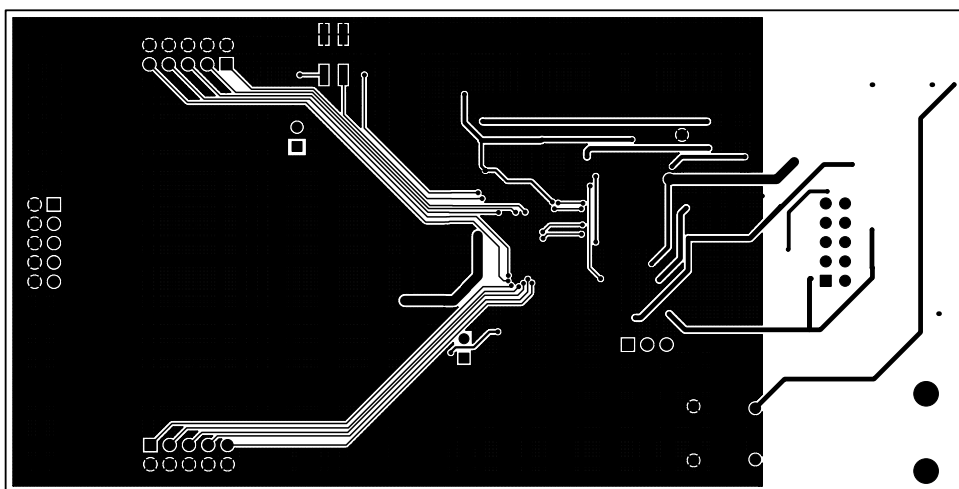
Si321xMDC-EVB with Si3201 Solder Side
